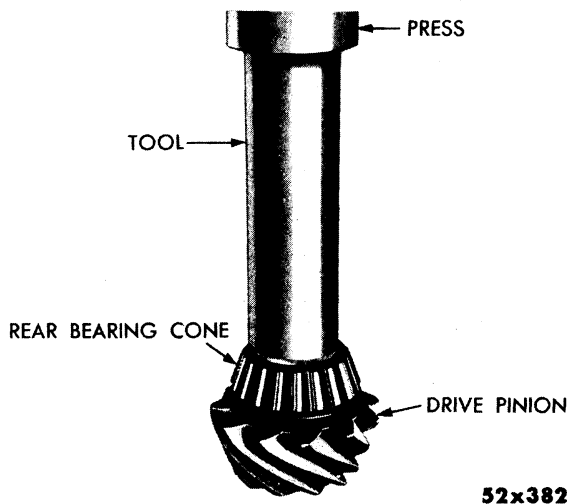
Installing Pinion Bearing Cone on Pinion Shaft
